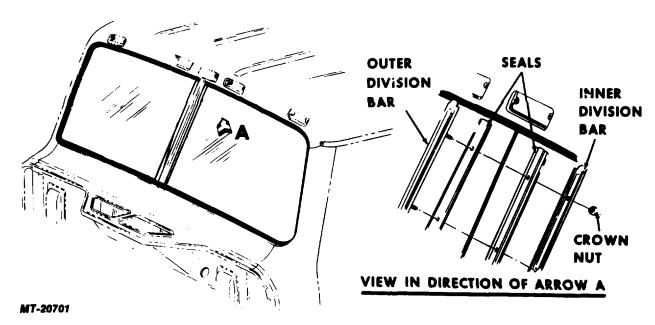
Details of Windshield Division Bar (230 cm or 90 Inch Cab Only)
